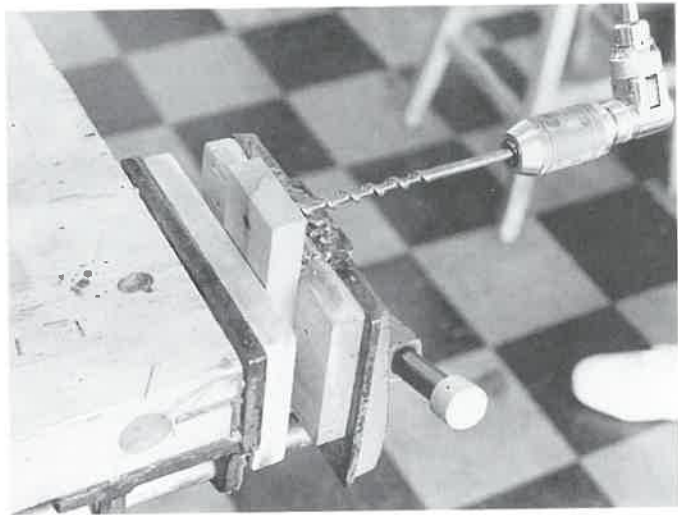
Back up your workpiece when drilling a through hole. Failure to do so may tear the wood.
